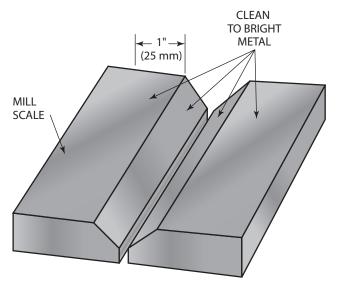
Clean all surfaces to bright metal before welding.
